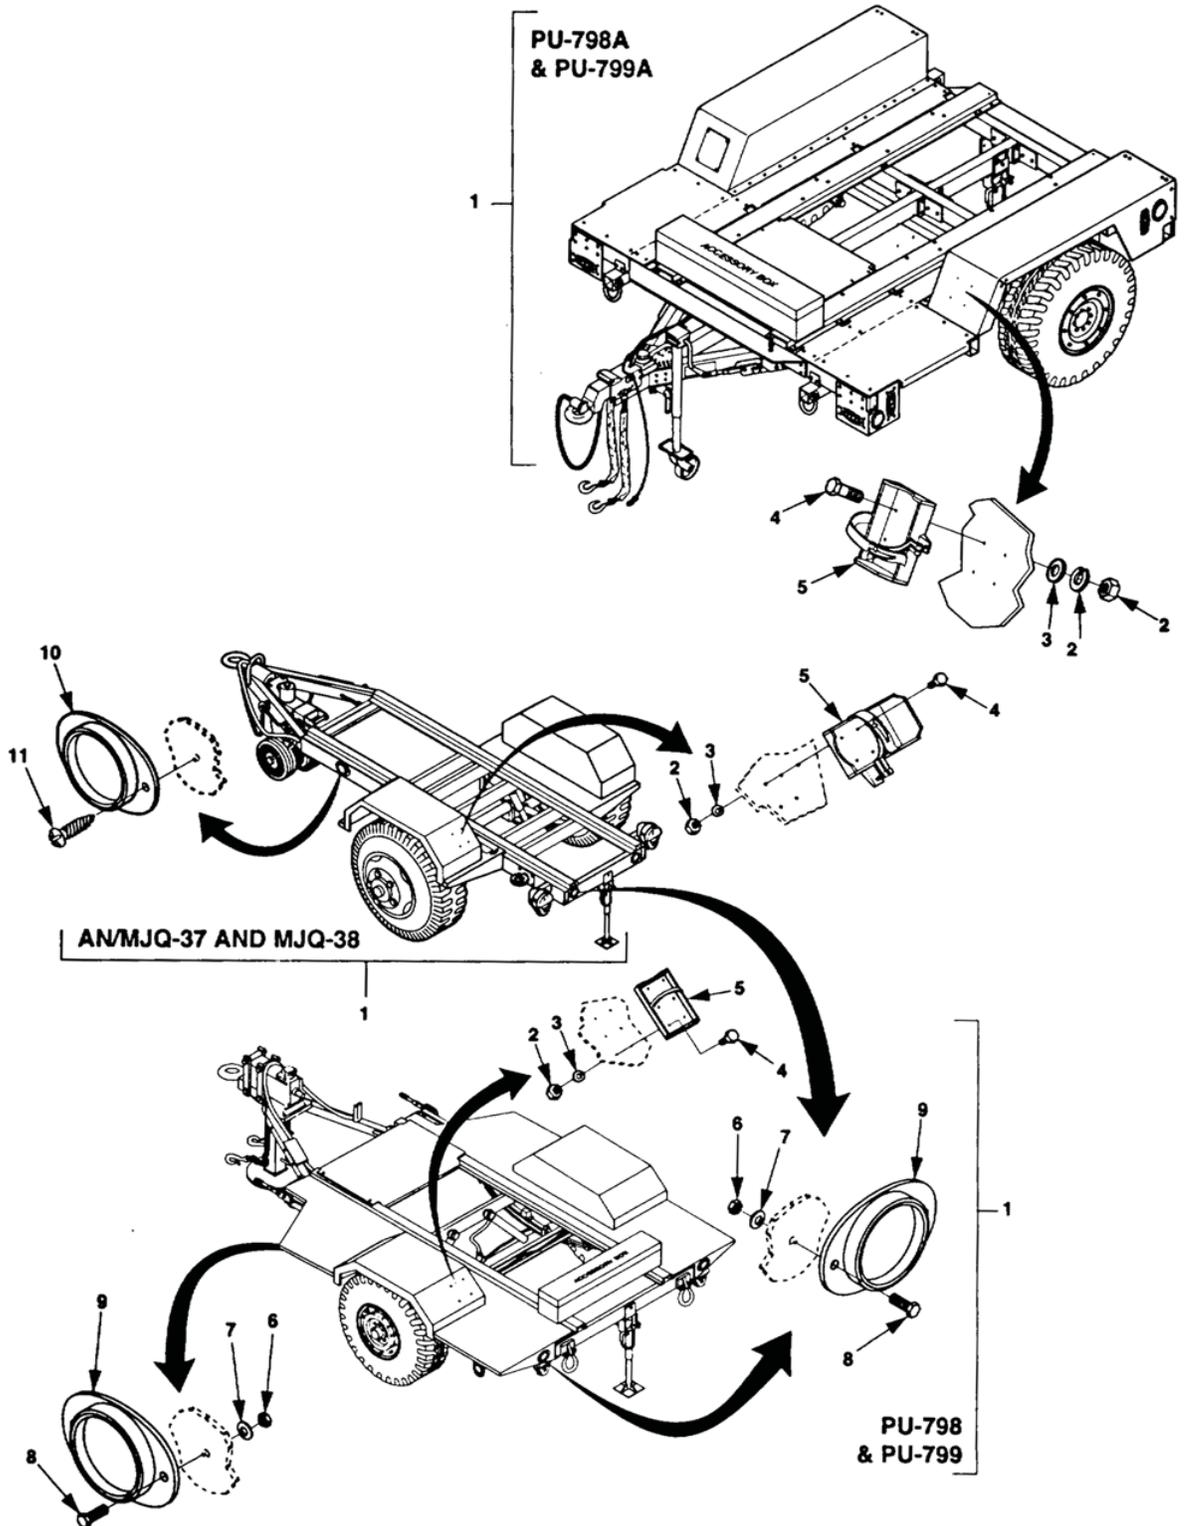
Power Plant/Power Unit Trailer Assembly (Sheet 1 of 2).
